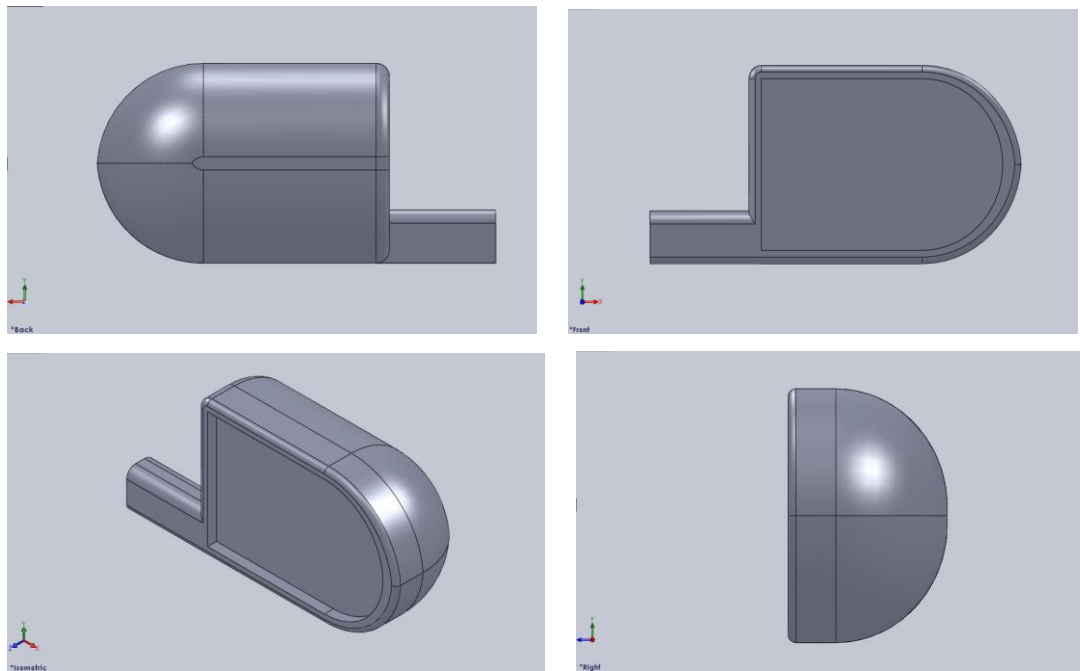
Front View and Isometric View of Passenger Car Model
